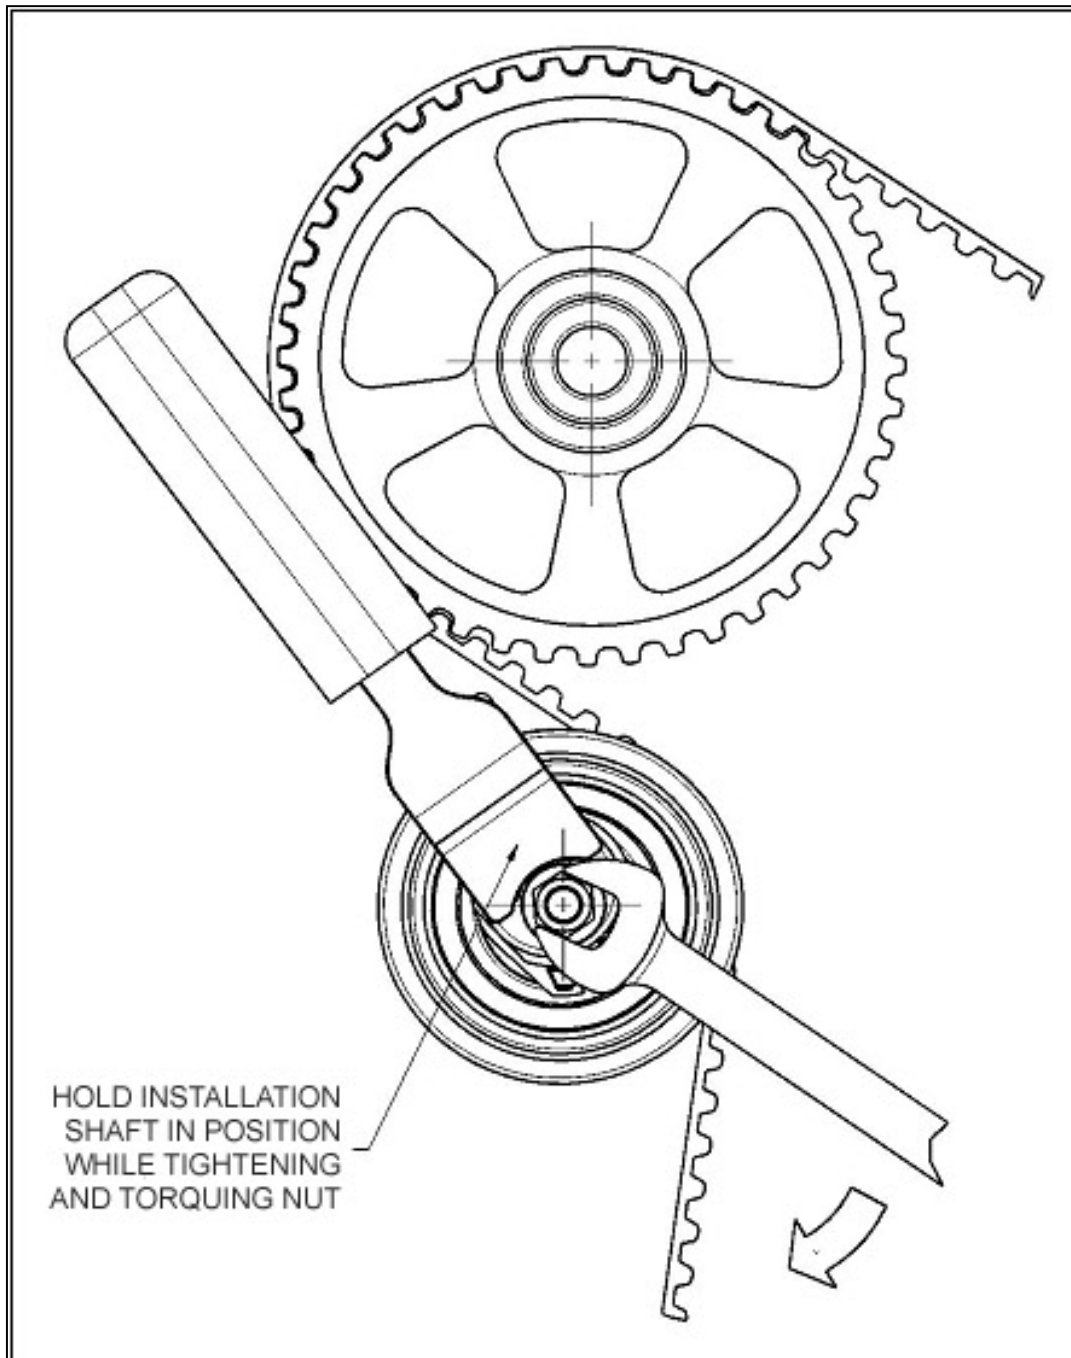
Tighten the nut to the specified torque, while holding the installation shaft in position.
